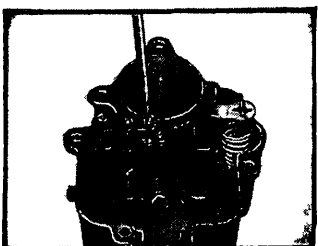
R m ve idle orifice tub and plug and attached parts. Rem v pin spring to detach fr m step-up piston and plate. Remove step-up piston spring and gasket from cylinder
